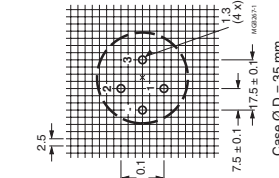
Mounting hole diagram viewed from component side Case Ø D = 35 mm
